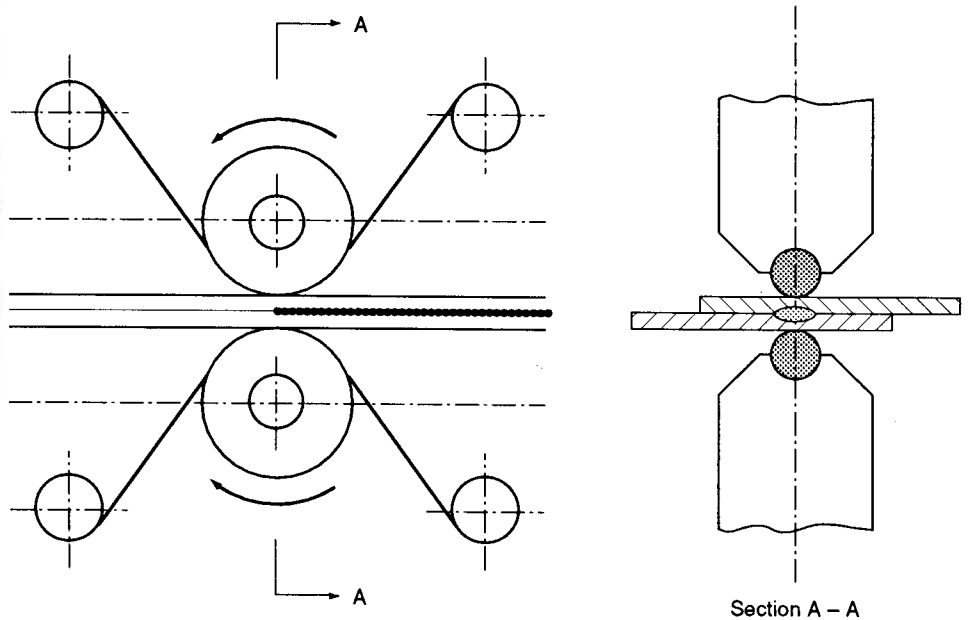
Typical setup for an electrode wire seam welding process showing positions of wire relative to grooved wheel
